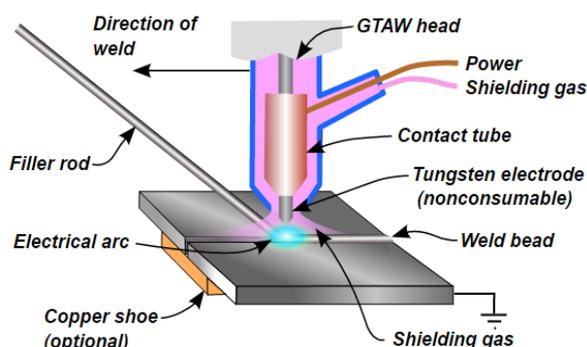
Principle of Operation of TIG Welding [1]
